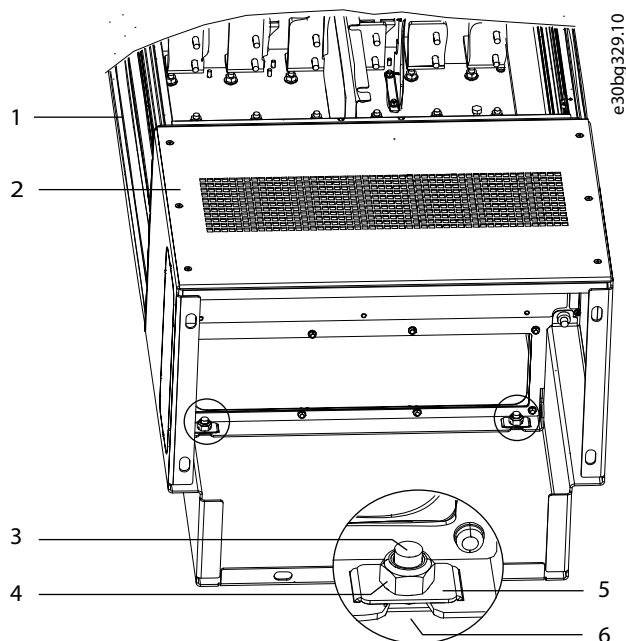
Pedestal-to-Cabinet Back Mounting Points
